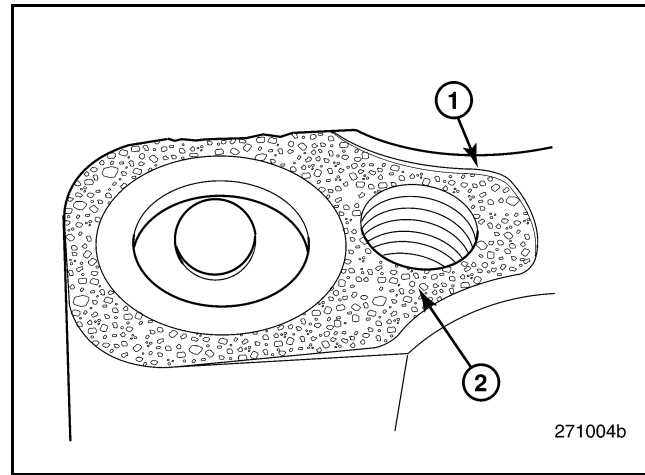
Severe Fretting Damage on Cylinder Head Rocker Arm Bracket Mounting Surface
